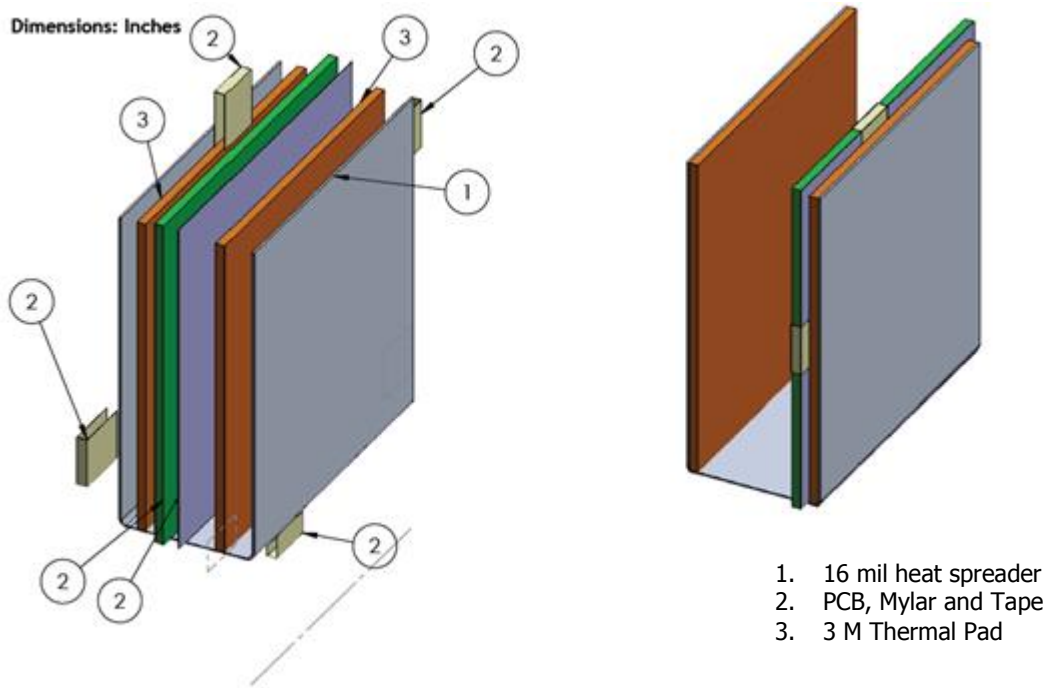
Heat Spreader, Thermal Pad and Mylar Assembly Drawings. Detailed Assembly Images in Next Section.
